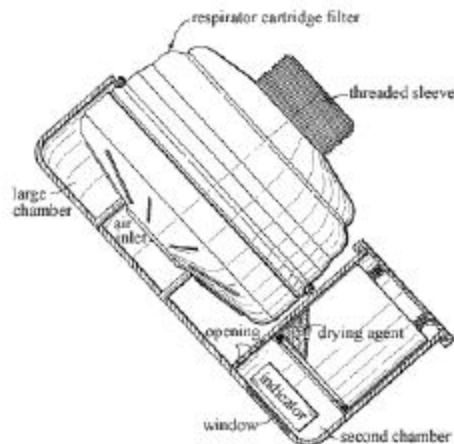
Auergesellschaft GMBH's supplementary filter attachment containing a drying agent and colourimetric indicator^[41].
